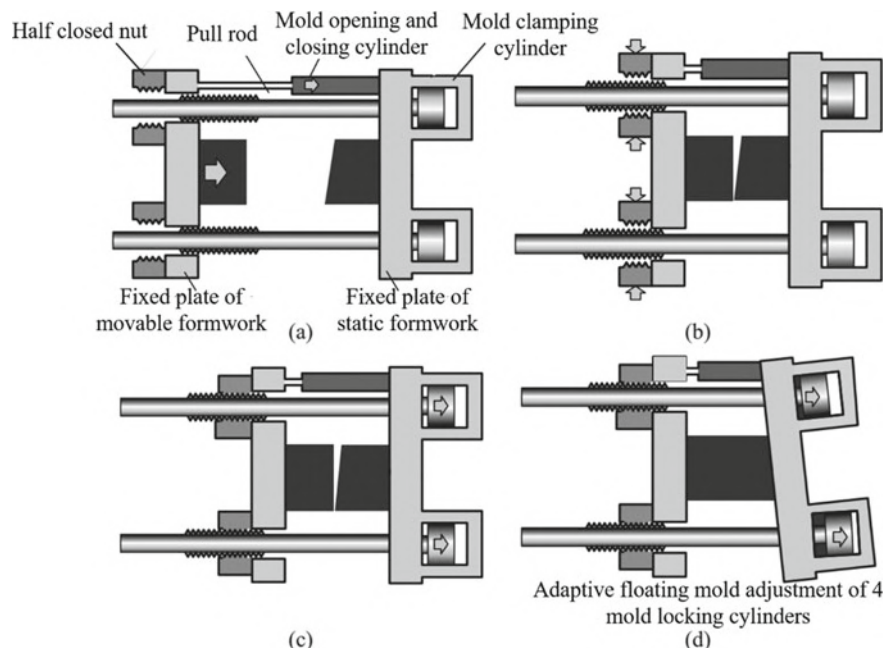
Clamping process of two plates compound clamping mechanism
